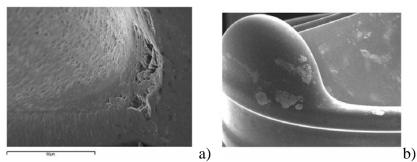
Housing of valve #15 porous surface in the hinge (a); valve #23 porous areas on the outer surface of the housing and in the centre of the leaflets (b)
